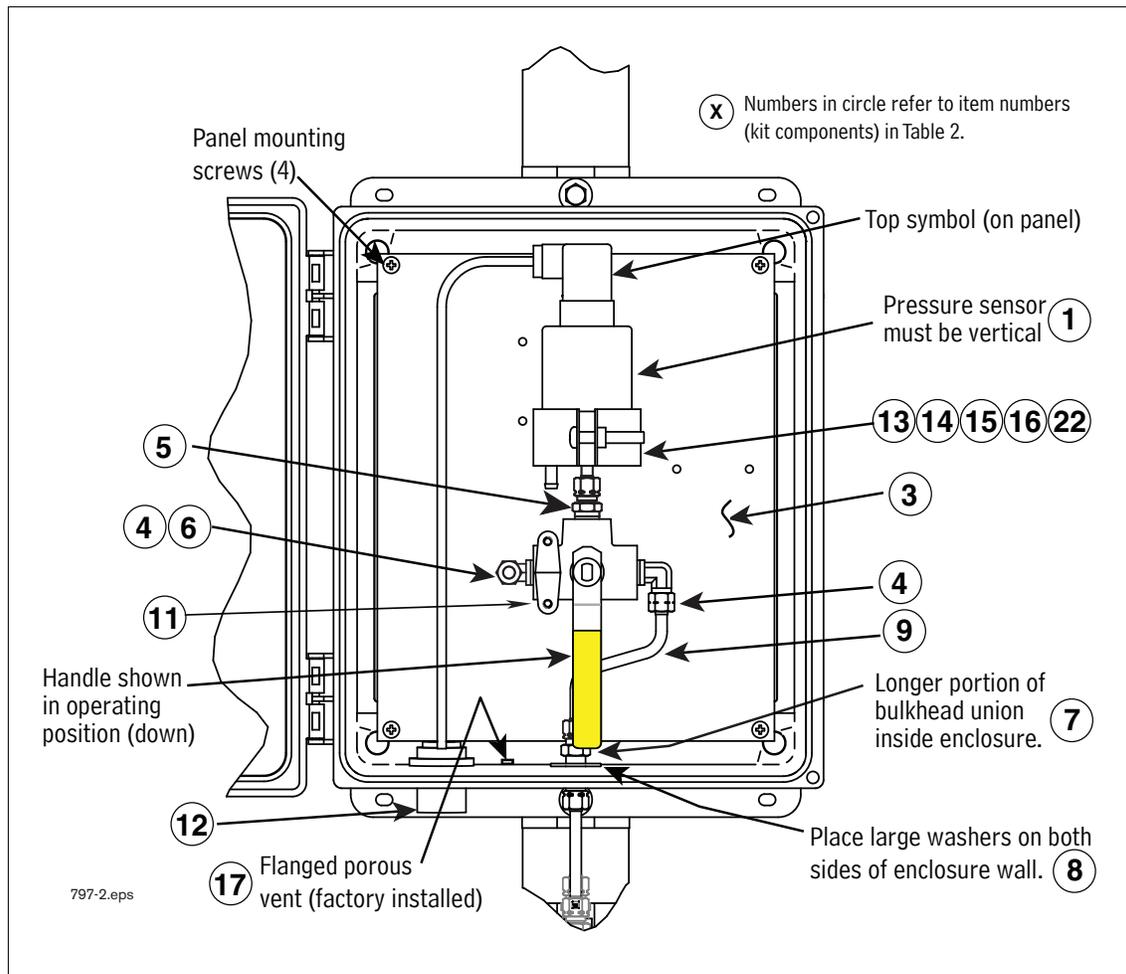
Mounting Pressure Sensor Assembly onto Composite Panel
